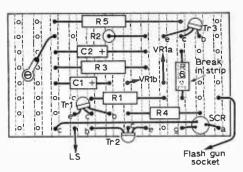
The component layout on Veroboard. The long cathode lead of the SCR should be sleeved. The solder tag screw also fits through the mounting bracket.
